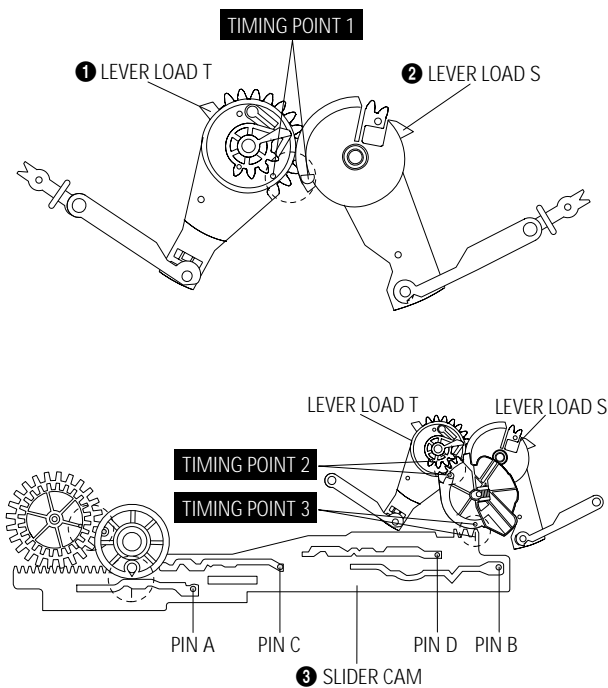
Gear Loading Drive, Slider Cam, Lever Load S, T Ass'y Assembly
